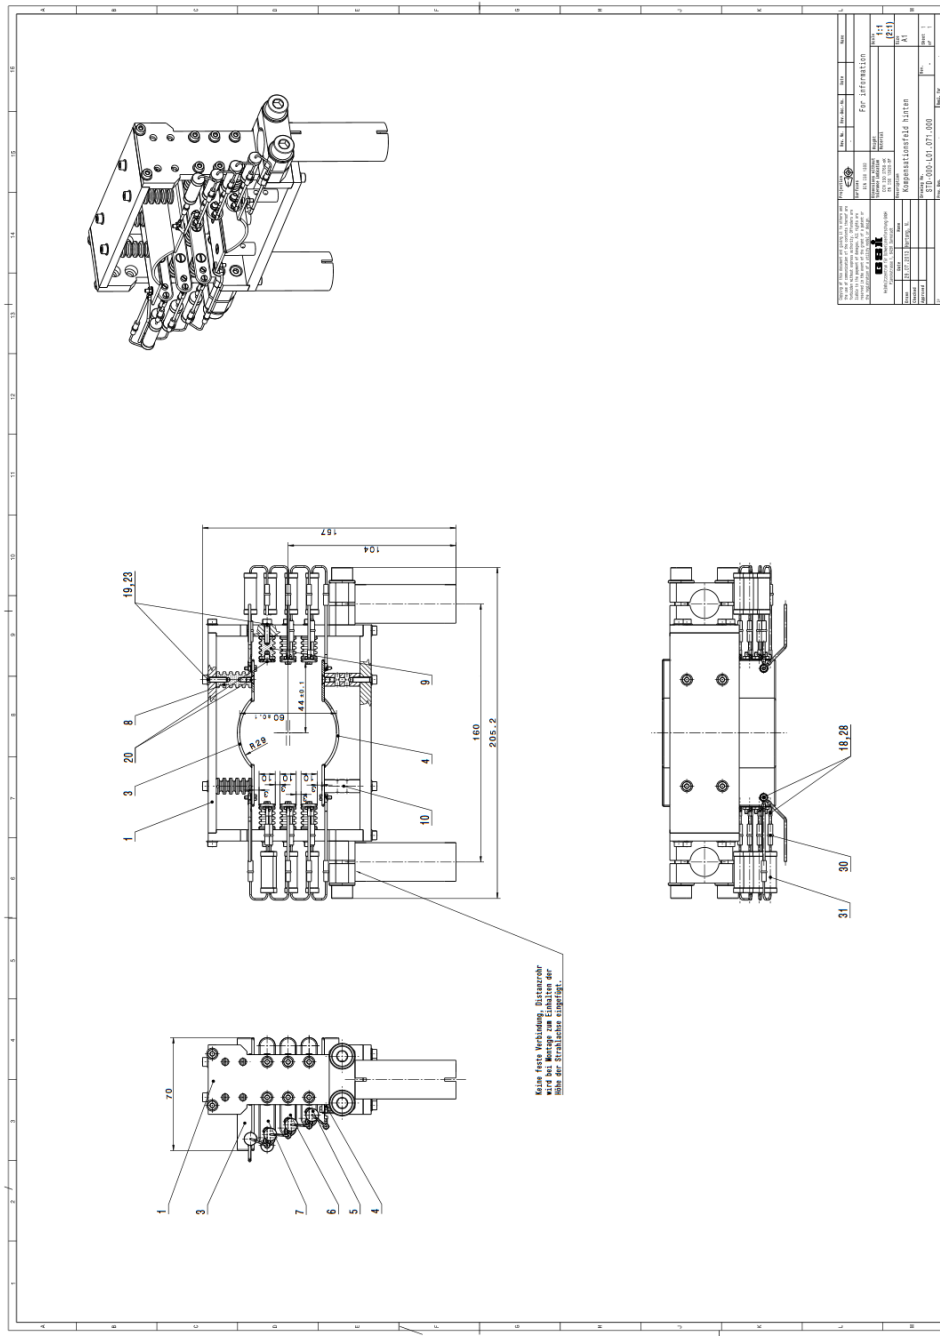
Technical drawing of the rear compensation electrode [117].
